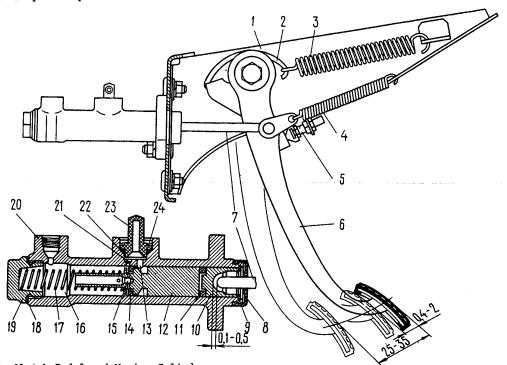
Clutch Pedal and Master Cylinder: 1 - clutch and brake pedals bracket; 2 - hook; 3 - clutch pedal servo spring; 4 - clutch pedal retracting spring; 5 - clutch pedal stop; 6 - clutch pedal; 7 - pushrod; 8 - boot; 9 - lockring; 10 - pushrod piston; 11 - sealing ring; 12 - master cylinder piston; 13 - inlet hole; 1/- sealing ring (circular valve); 15 - piston l ss hole; 16 - cylinder working chamber; 17 - piston retracting spring; 18 - gasket; 19 - plug; 20 - master cylinder barrel; 21 - bypass (compensating) hole; 22 - union gasket; 23 - union; 24 - lockwasher
